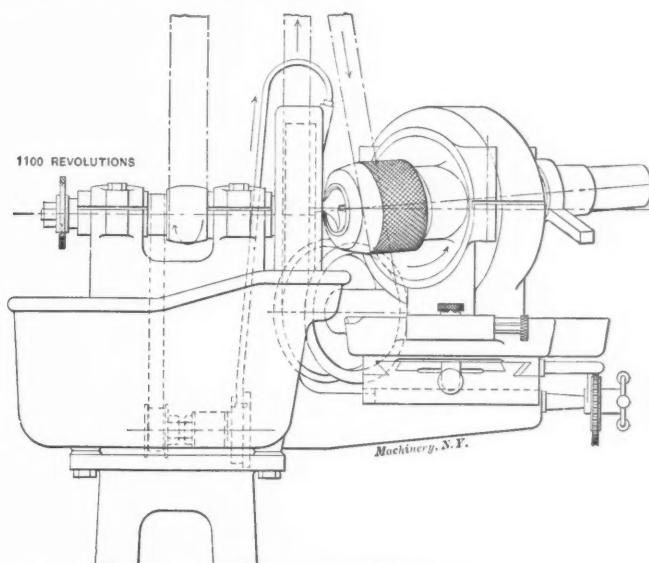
Side Elevation of the Schmaltz Grinder Broken Away, showing Arrangement of Belting.
